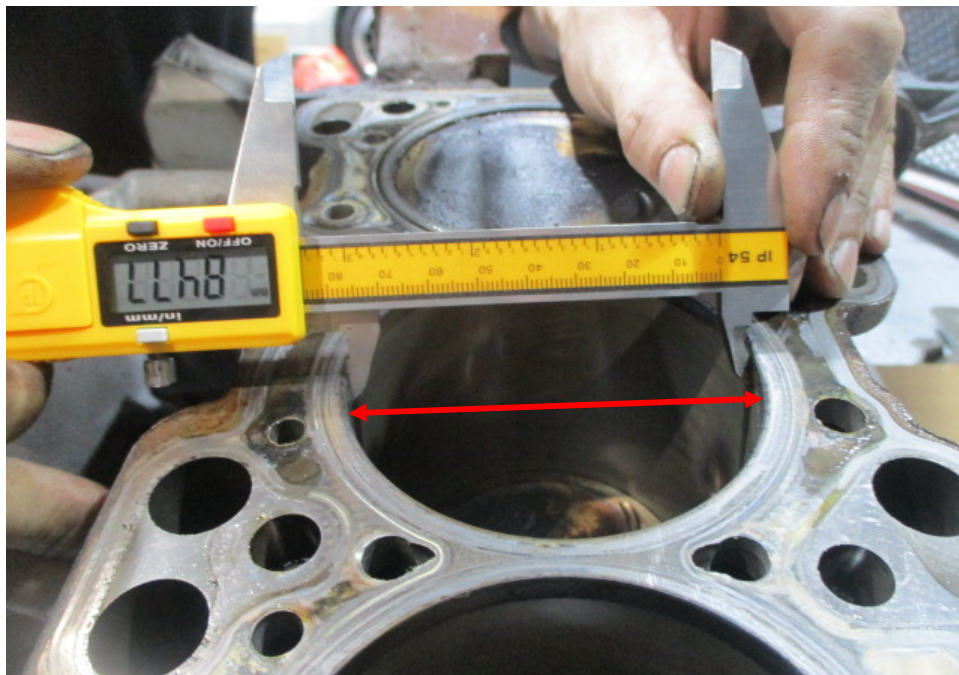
shows measurement being carried out to the bore (arrowed) of cylinder 2 of the Mitsubishi engine. The bore measurement of cylinder 2 was recorded to be 84.77mm.
